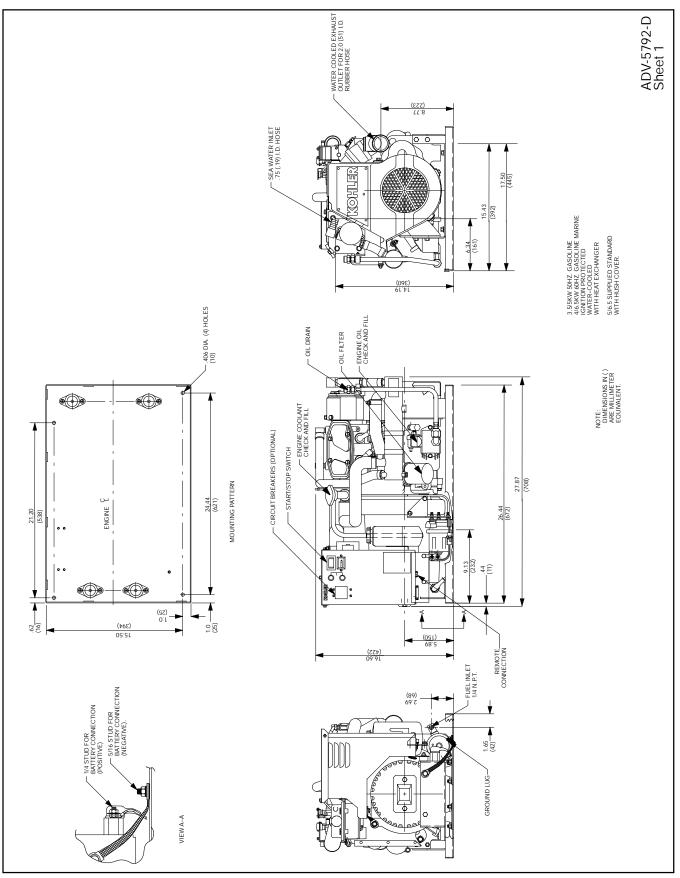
Dimension Drawing-3.5CFZ, 4CZ, 5CFZ, and 6.5CZ
